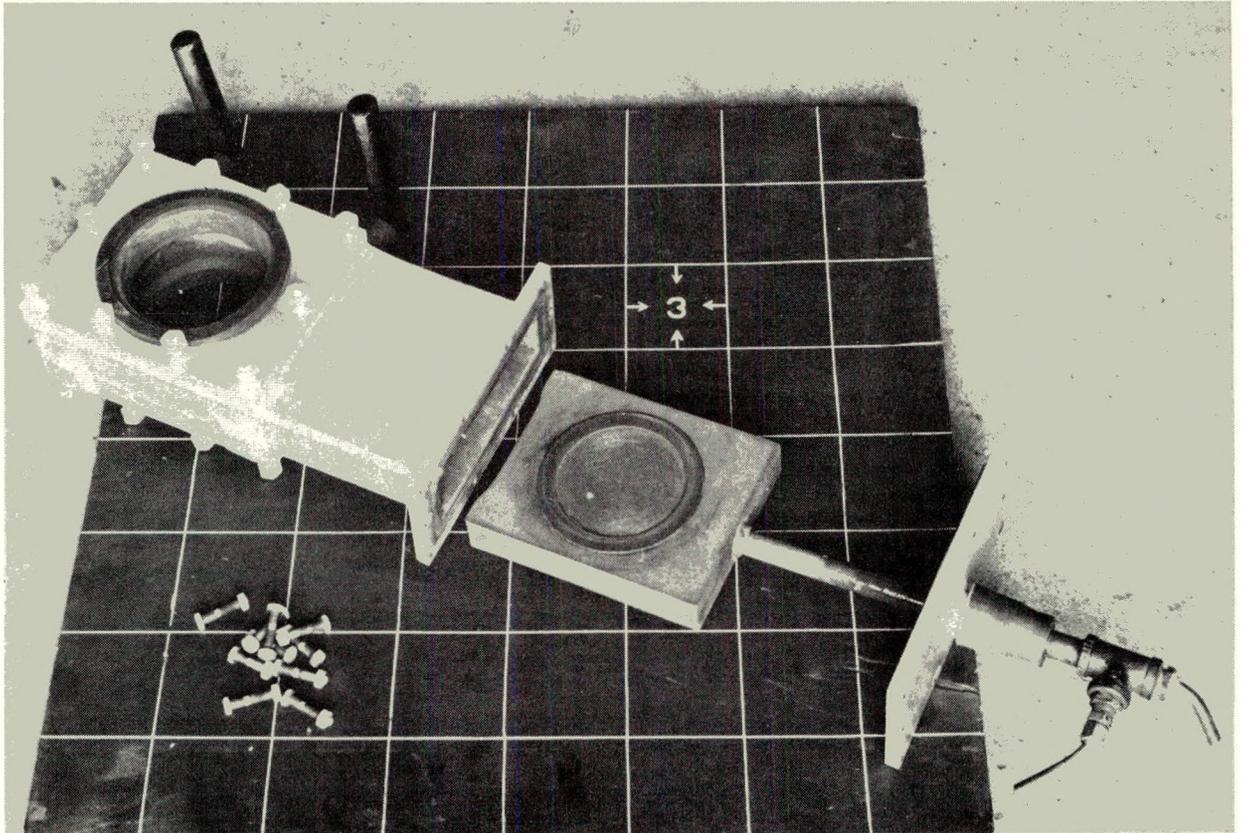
Typical Slide Valve Disassembled to Show Parts.
